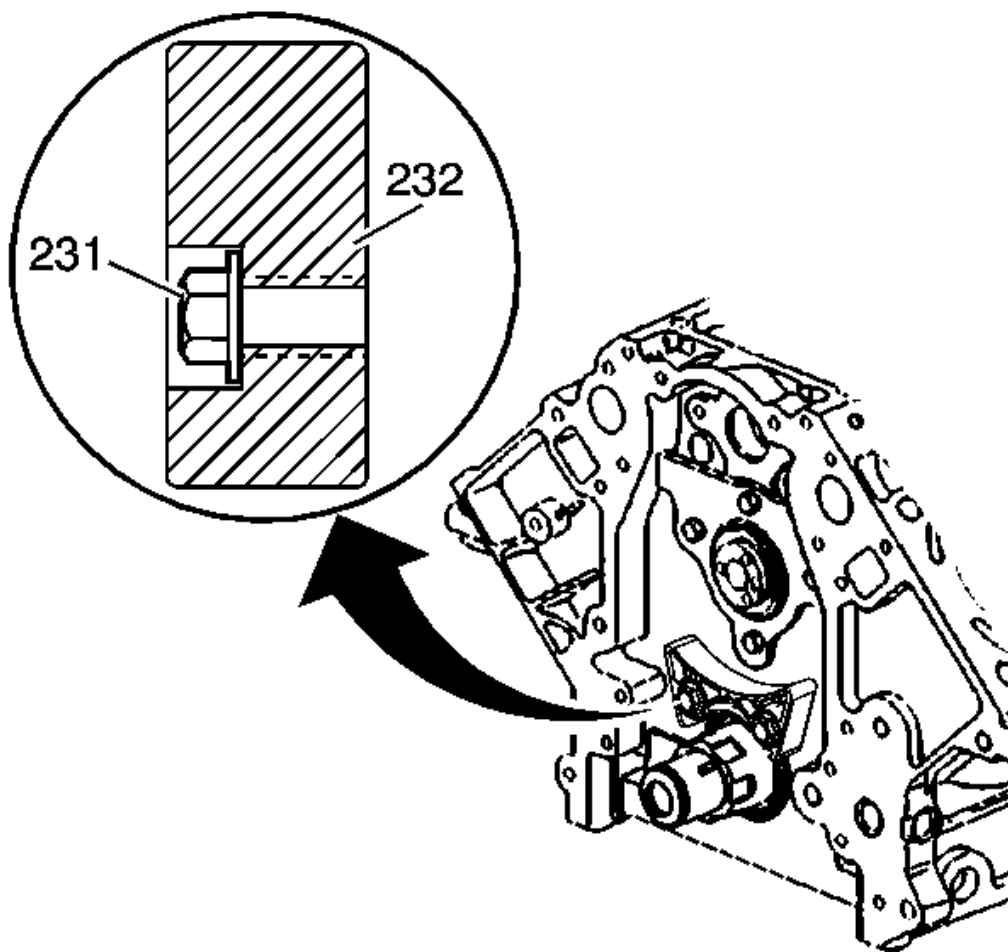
Identifying Timing Chain Dampener Bolt Proper Installation Position
